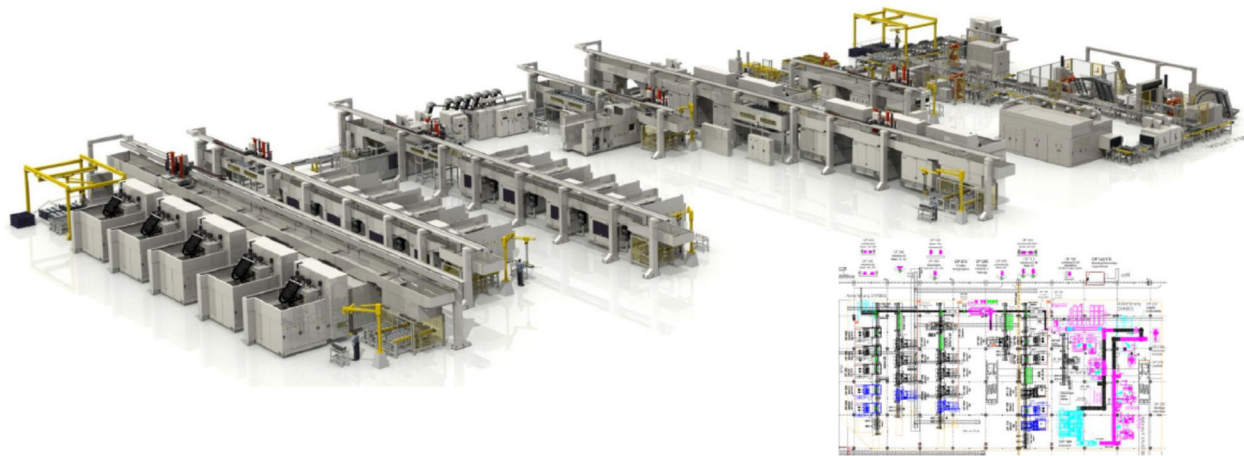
Turn-Key production line for cylinder heads made of CGI with milling machines for pre-machining and CNC-machining centers SPECHT 800 for finish machining, gun drilling and lineboring on special machines
